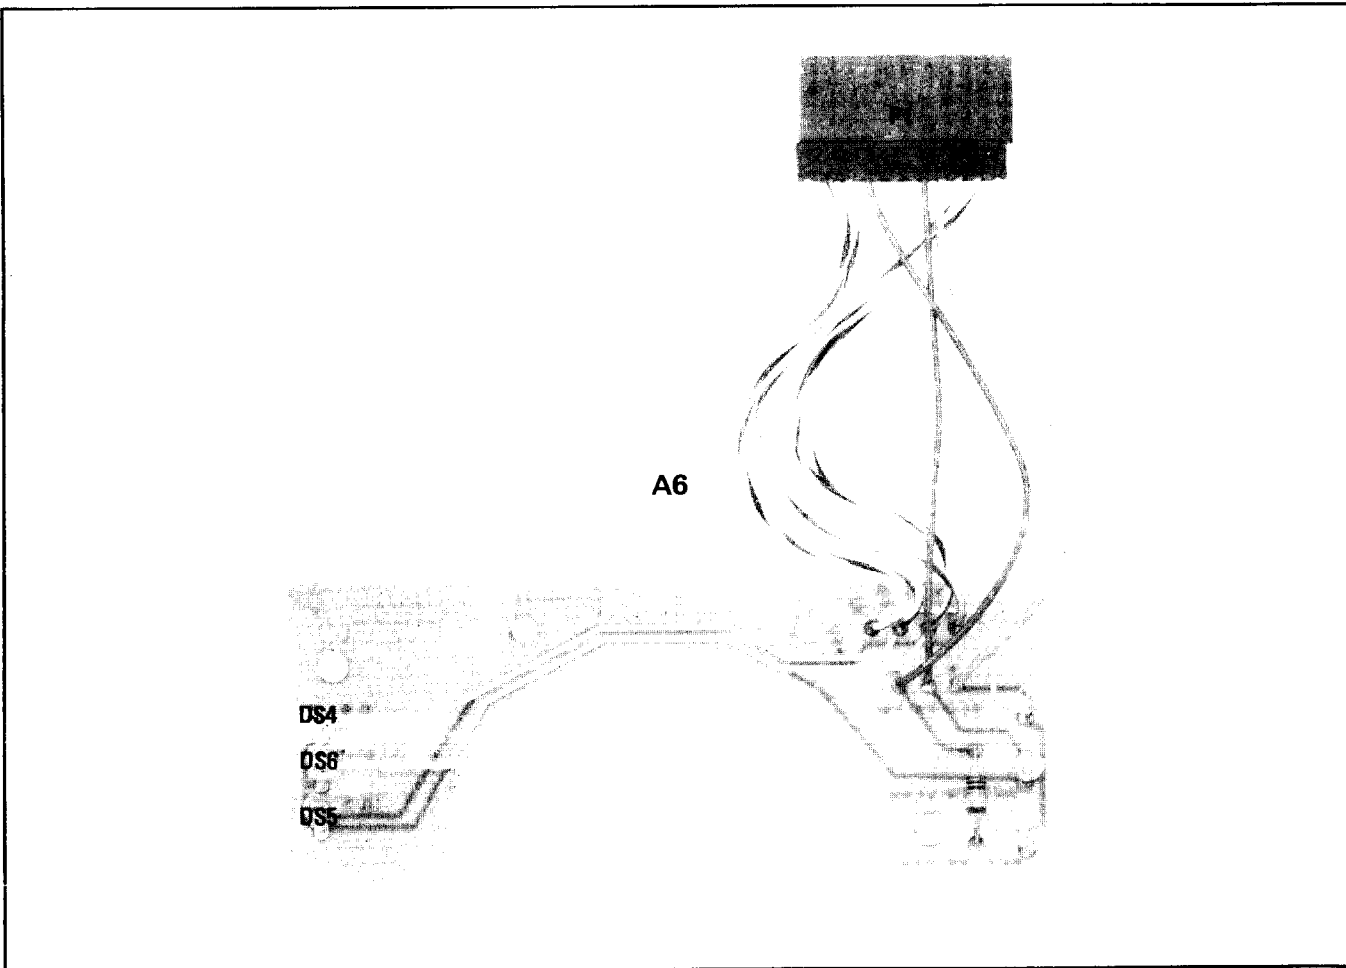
P/O A6 Annunciator Assembly Component Locations
